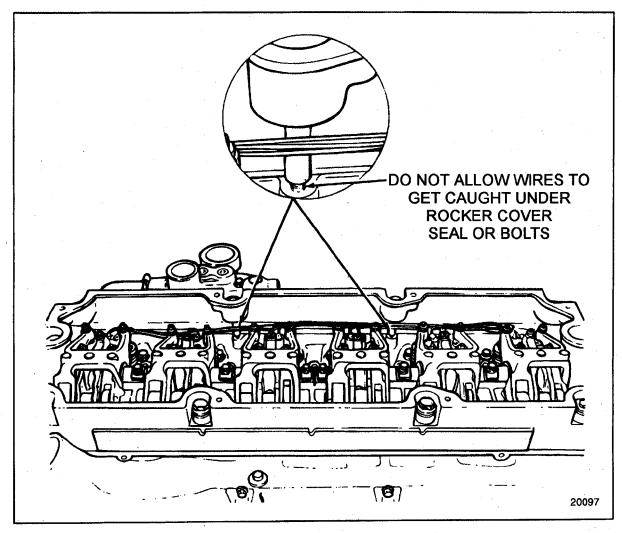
Rocker Cover Base Hold-down Bolt Installation
